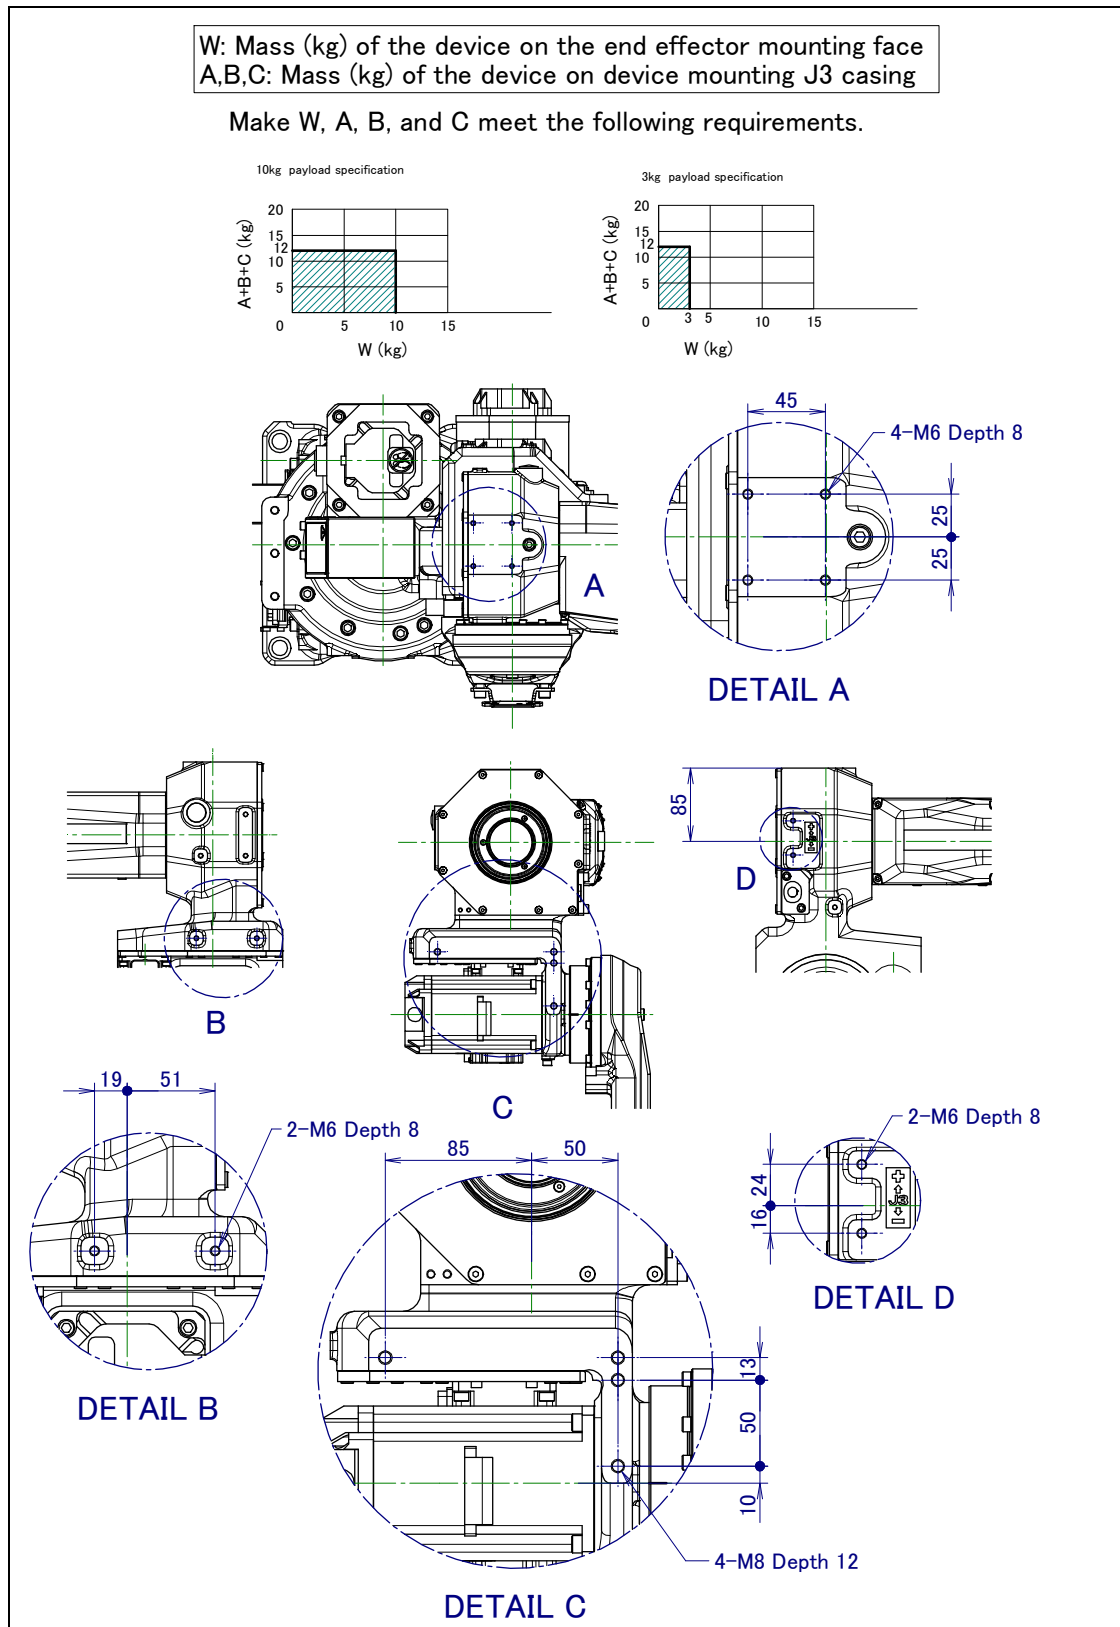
(b) Equipment mounting faces (ARC Mate 100iC/10S, M-10iA/10S)
